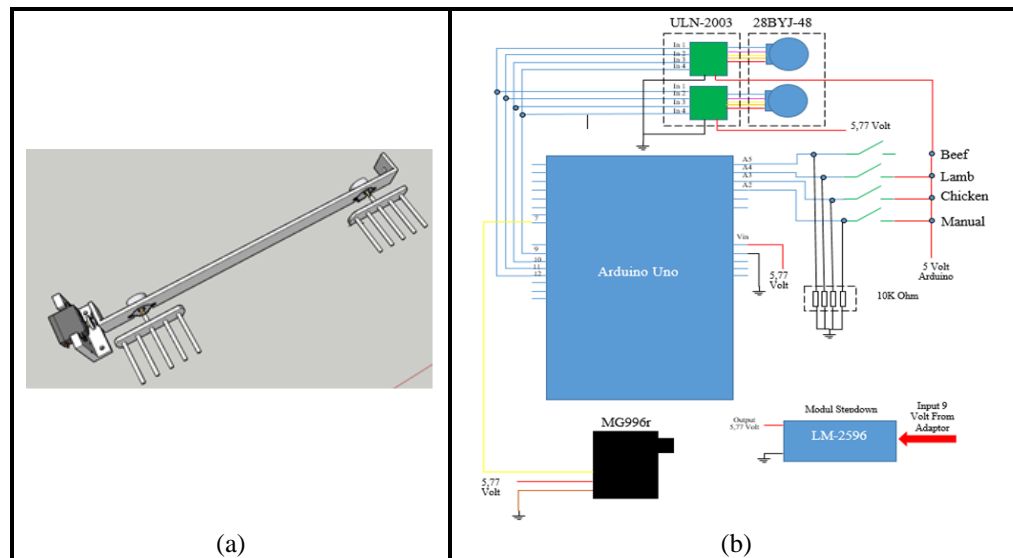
(a) Roasting Arm Robot Design, (b) Roasting Arm Robot Circuit
